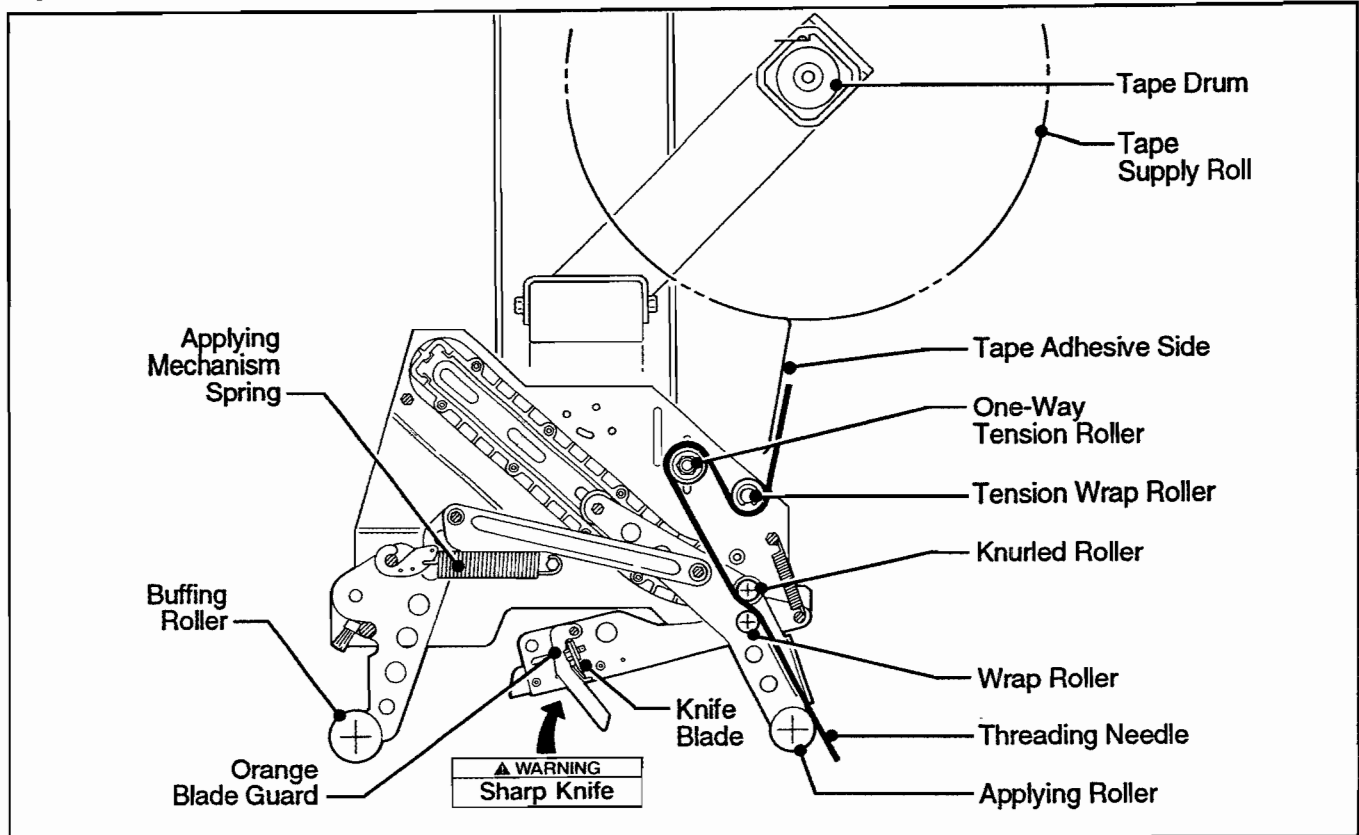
Taping Head Components/Threading Diagram, Upper Head
